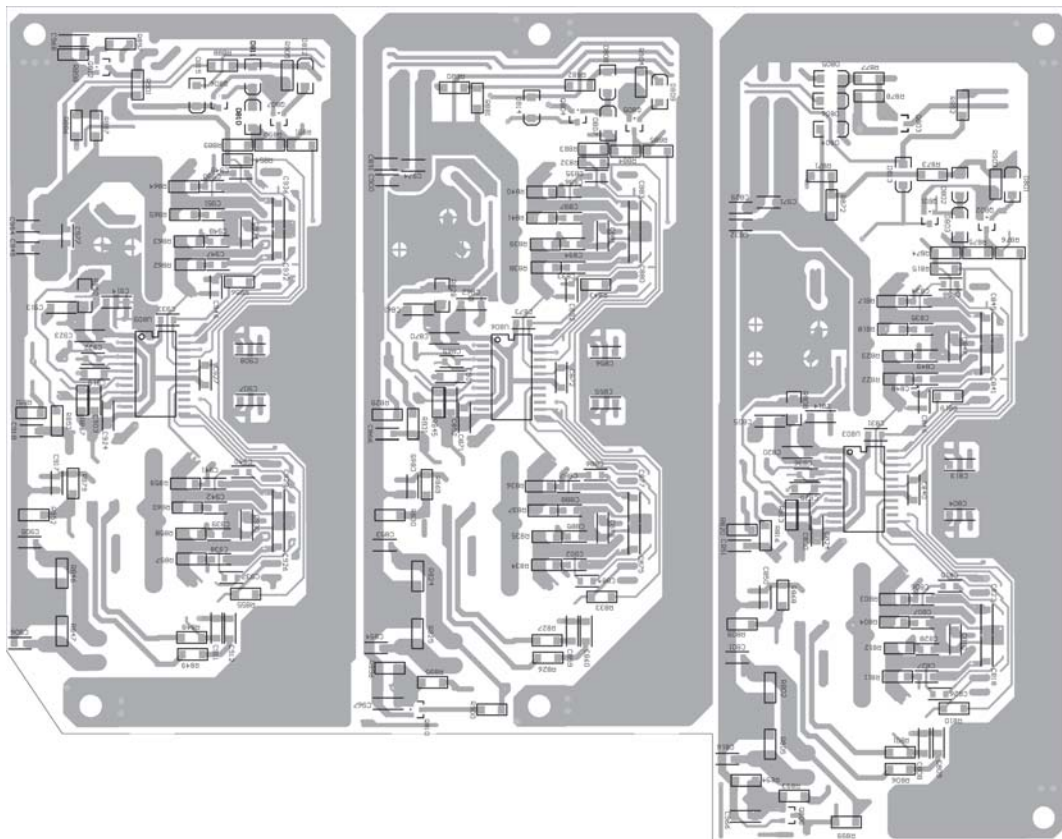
Class-D Amplifier PCB Assembly, P/N: 306282, Bottom Etch Layout
